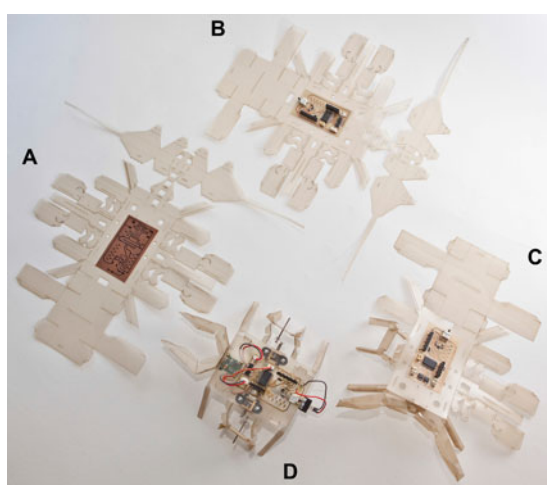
Overview of the origami-inspired printed robot fabrication process. (a) Mechanical substrate (PEEK) is laser machined to define the crease pattern and the electrical system consisting of a circuit etch mask printed using a commercial solid-ink printer onto a layer of copper is laminated onto the mechanical substrate. (b) Exposed copper is etched away with ferric chloride, and discrete electrical components and actuators are added with pick-and-place assembly. (c) and (d) Design is folded and locked into place with integrated tab-and-slot fasteners.
